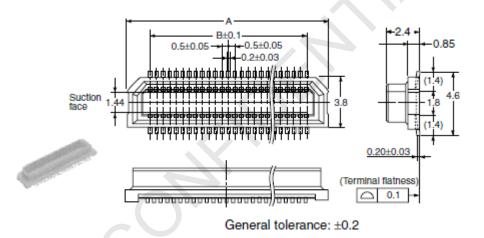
Panasonic AXK680347YG board-to-board connector pin side
